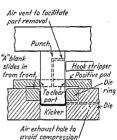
, Simple form of drawing die for use with heavy stock.
